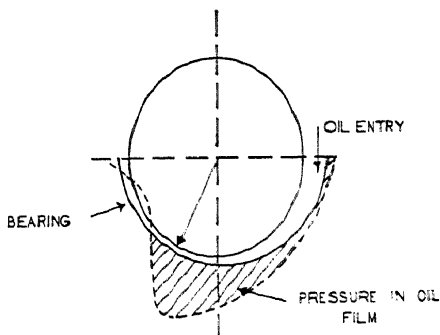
LUBRICATION OF SHAFT AND BEARING
